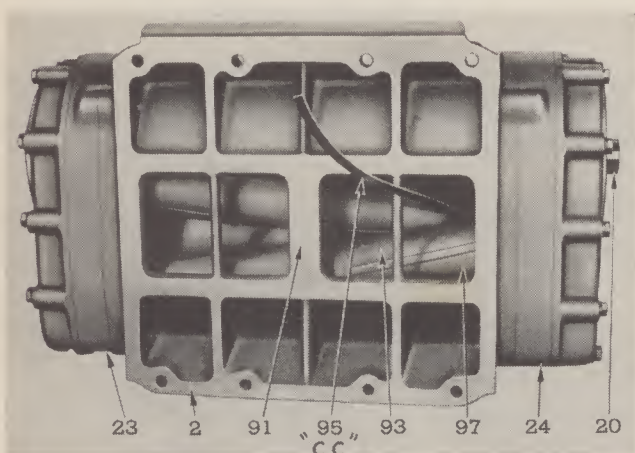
C—Method of checking rotor clearance "CC" with feeler gage ribbons. Measurements should be made both from inlet and outlet sides of blower.
